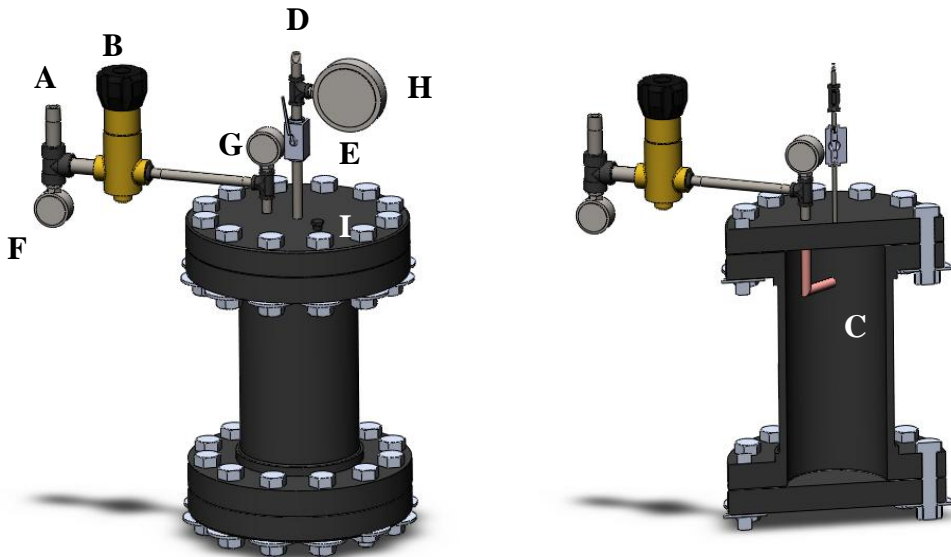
High-pressure seeder. Left: full view, showing critical components and flowpath. Right: cross-section, showing angled copper tubing
